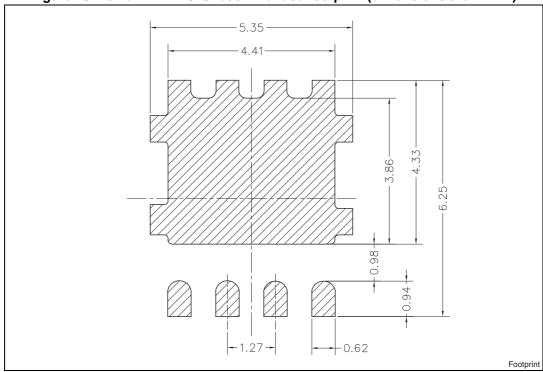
PowerFLAT™ 5x6 recommended footprint (dimensions are in mm)
